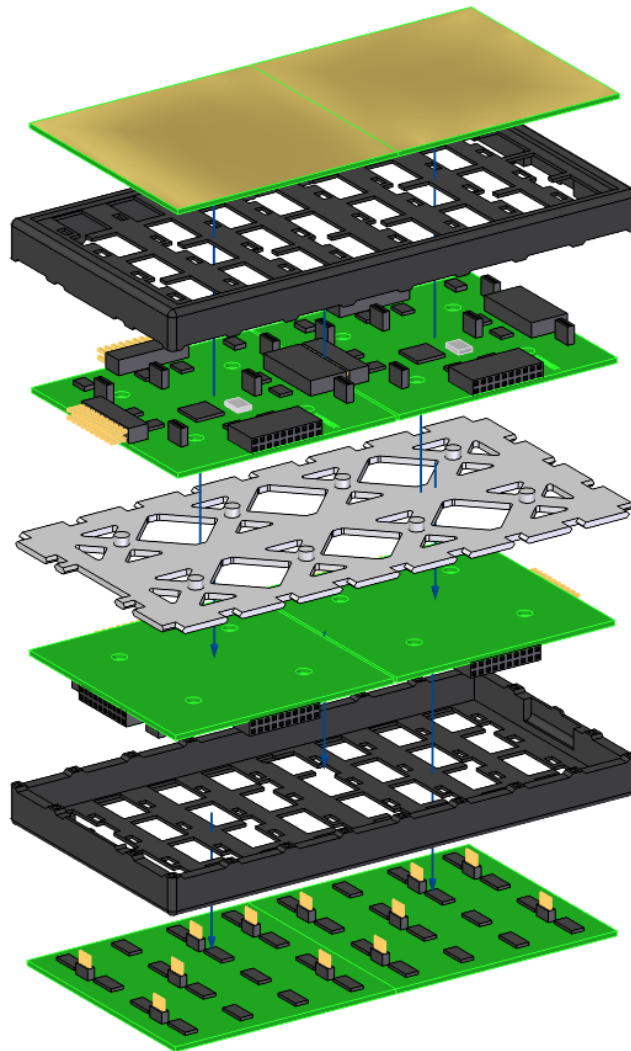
Explosion view of the tactile book. The center plate (gray) and the two case parts (black) are made from ABS plastic using a 3D printer. As described in section 3.3 the four sensor modules consist of two parts each.
